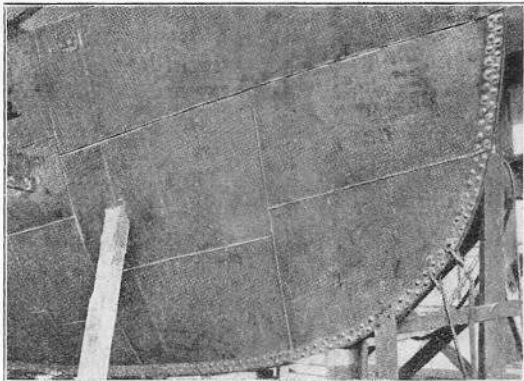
Welded Seams at Bow of Motor Launch.
